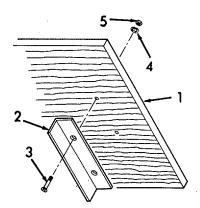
Clothing Sewing Machine Tray, Installation.
